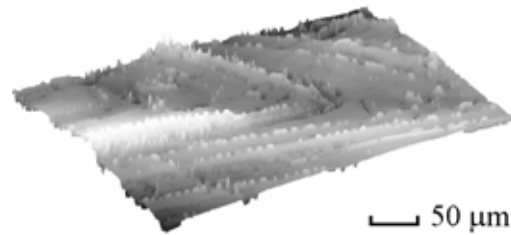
Surface micro-geometry of a weld.
